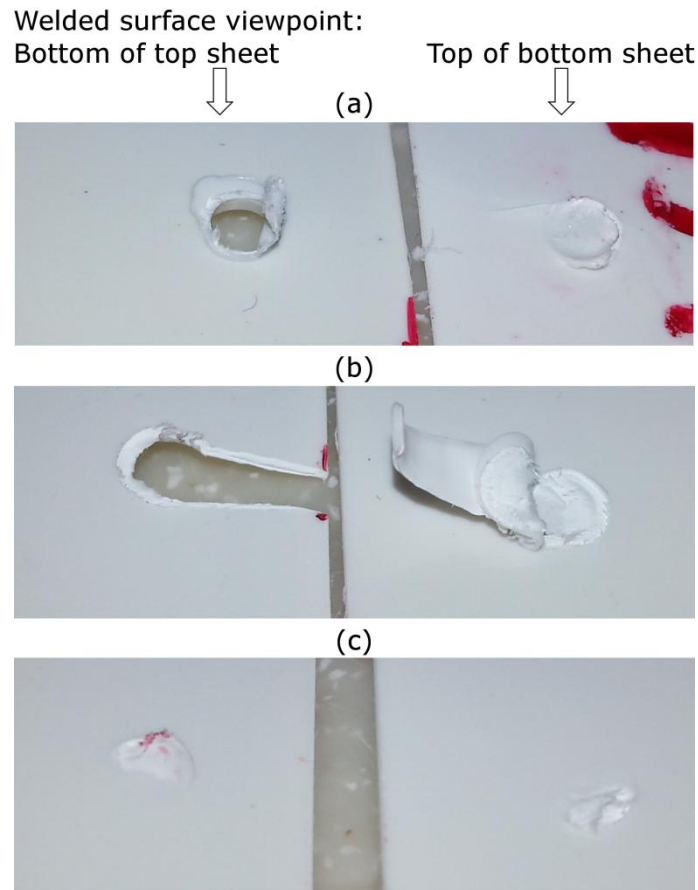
Plastic welding samples from first round of testing. (a) Over-penetration, resulting in complete peel-out of top layer; (b) proper penetration resulting in multiple failure modes; (c) inadequate penetration resulting in incomplete welding
